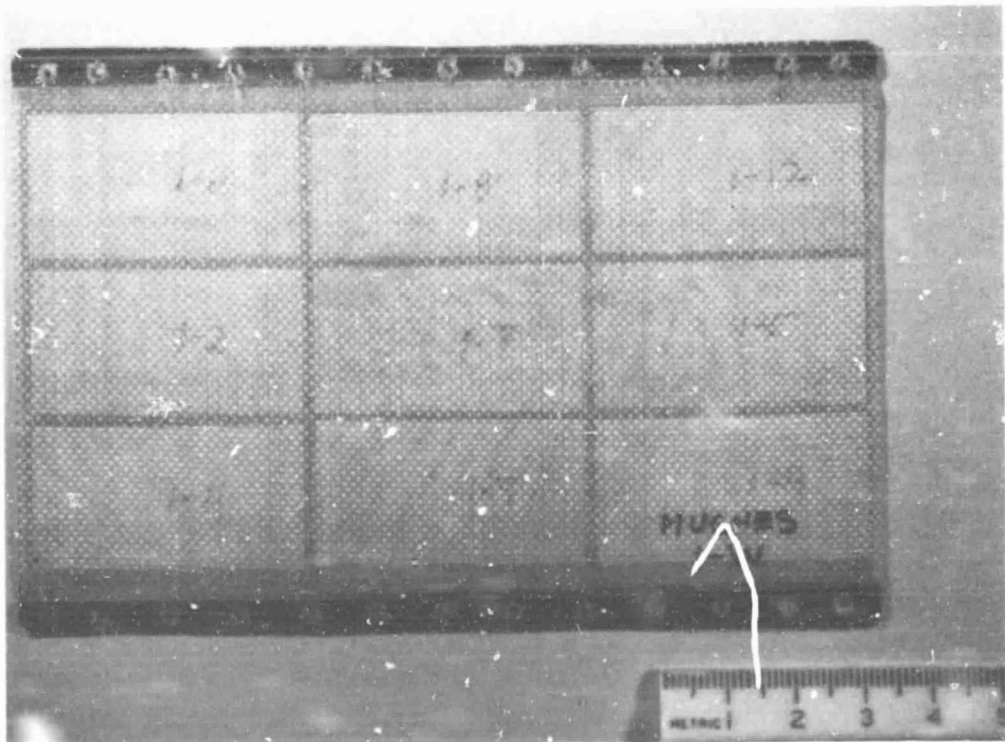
ULTRASONICALLY WELDED MODULE BACK
